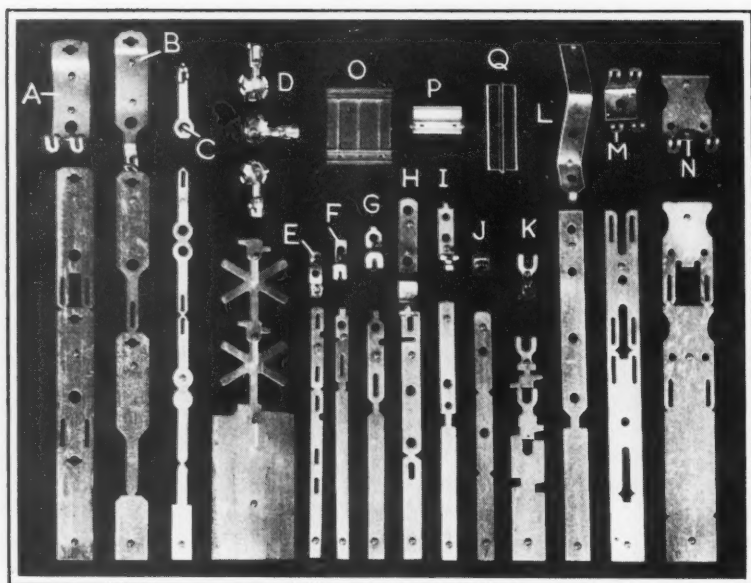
Examples of Parts Produced on Multi-slide Machines
